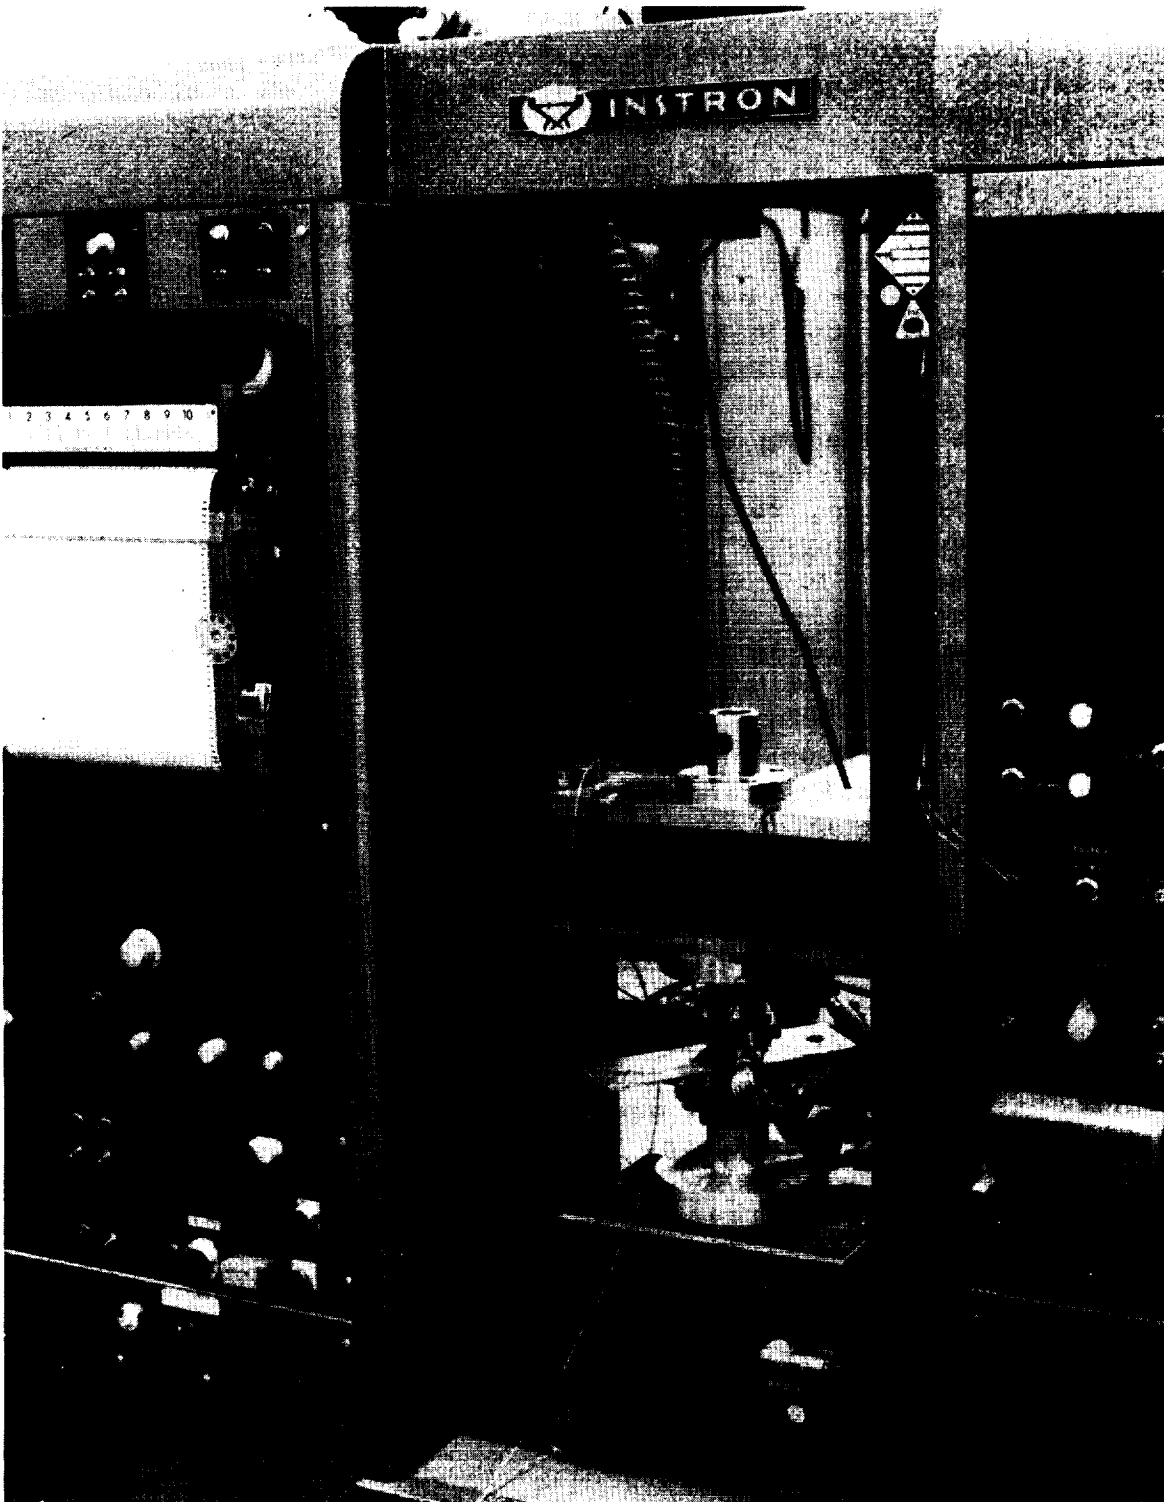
RIVET INSTALLATION - INSTRON TEST MACHINE
